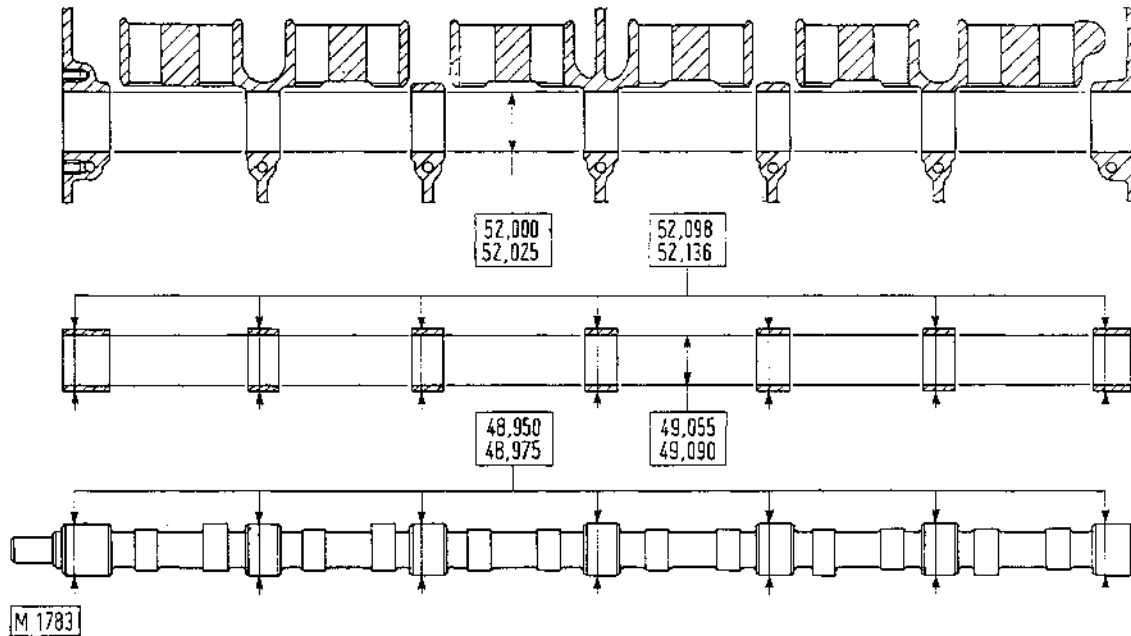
Dimensions of camshaft journals, bushings and relevant seats.
